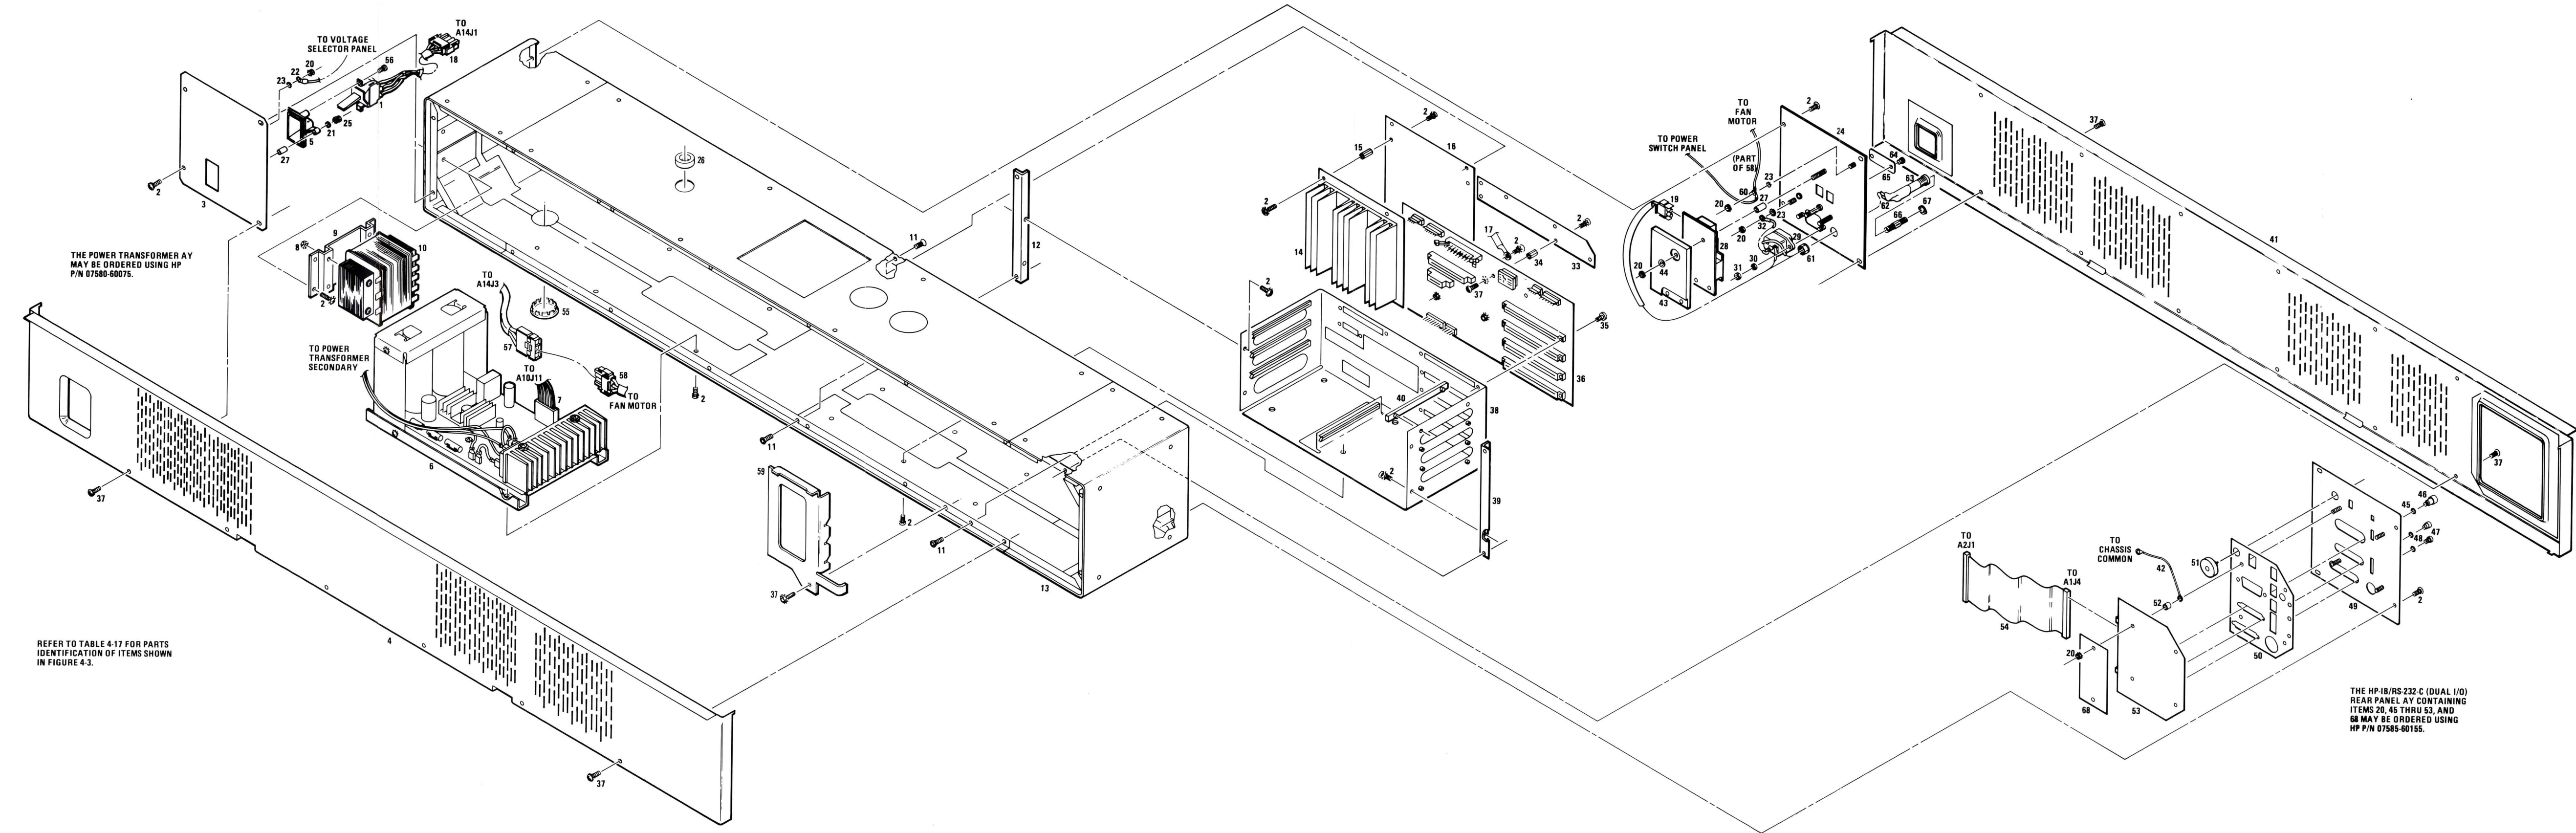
Electronic Enclosure Assembly, Illustrated Parts Breakdown
